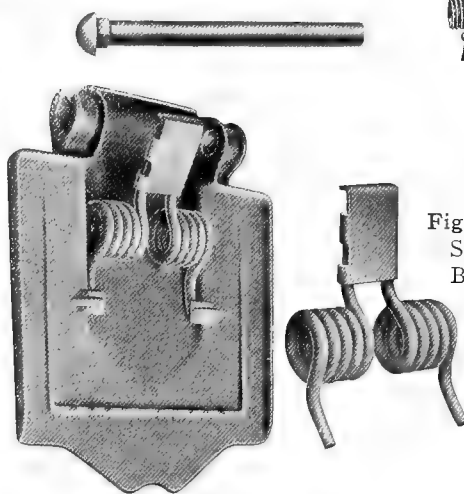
Symington Malleable Iron Torsion Spring Lid, Spring and Bolt.
